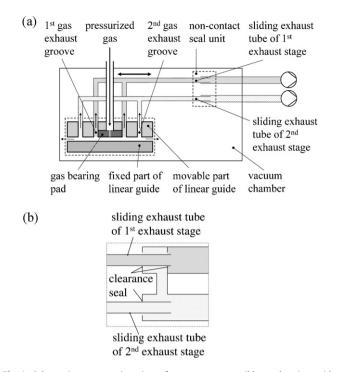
Schematic, cross-section view of a vacuum compatible gas bearing guide. (a) vacuum compatible gas bearing guide with two-stage exhaust system and (b) enlarged view of the non-contact seal unit.
